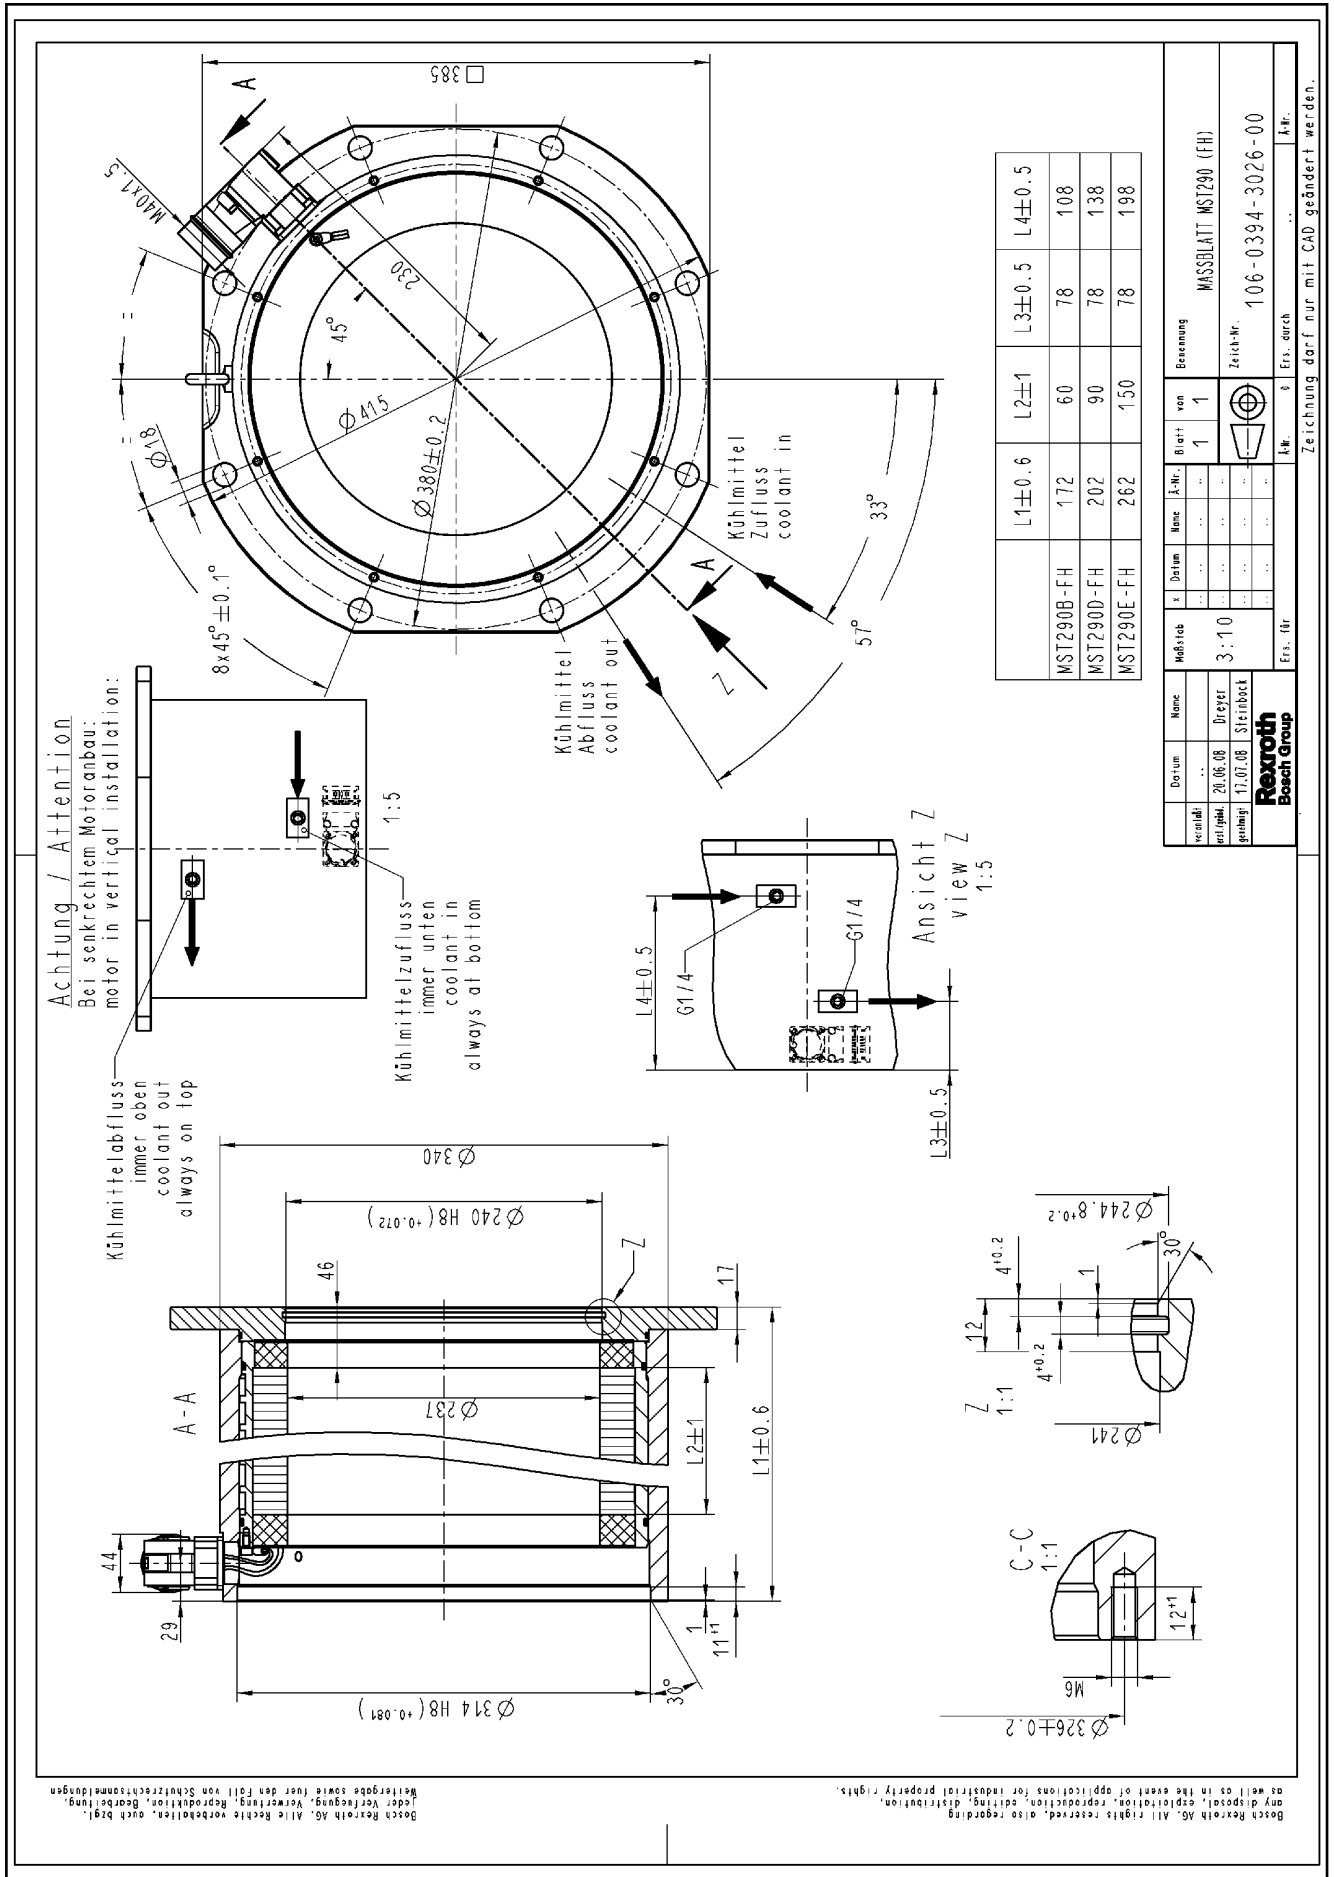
Dimension sheet for stator MST290 with housing (design "FH")
